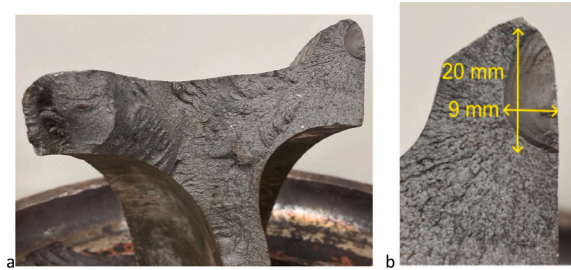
Fracture in position 2 of figure 3. a) Overview of fracture surface. b) Detailed view of the fatigue crack.
